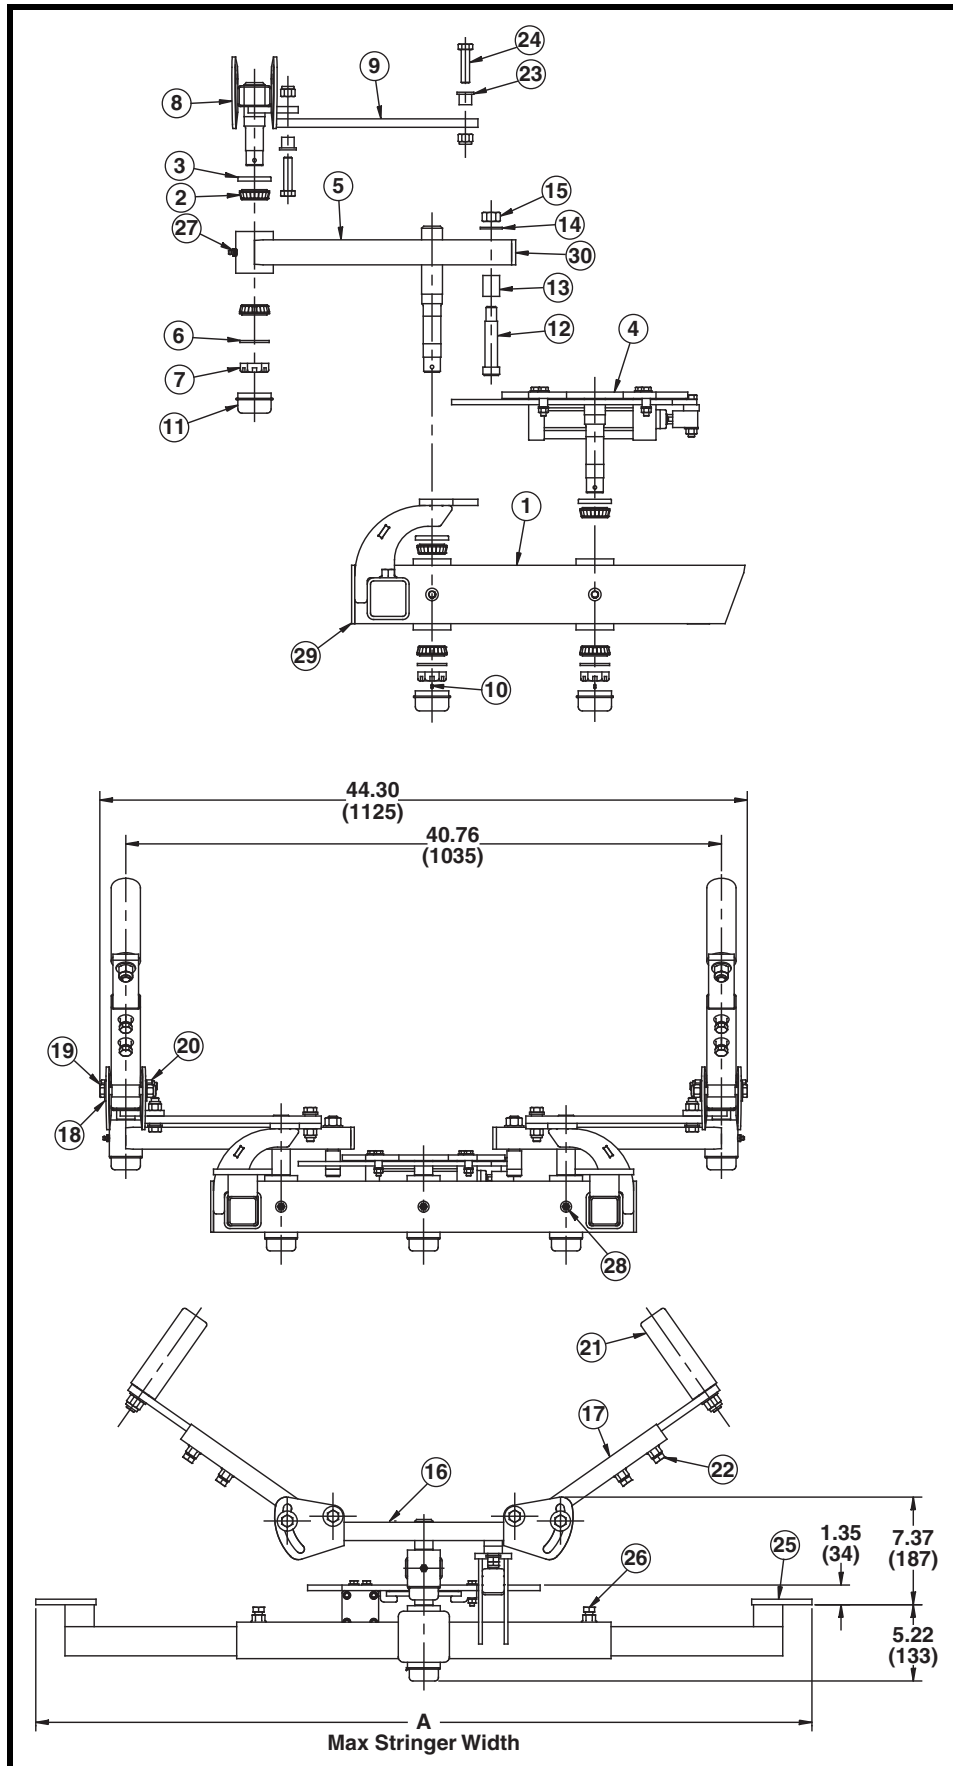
Martin® Tracker™ Reversing (Upper Unit), P/N TKR-XXURSXXX-XXX
